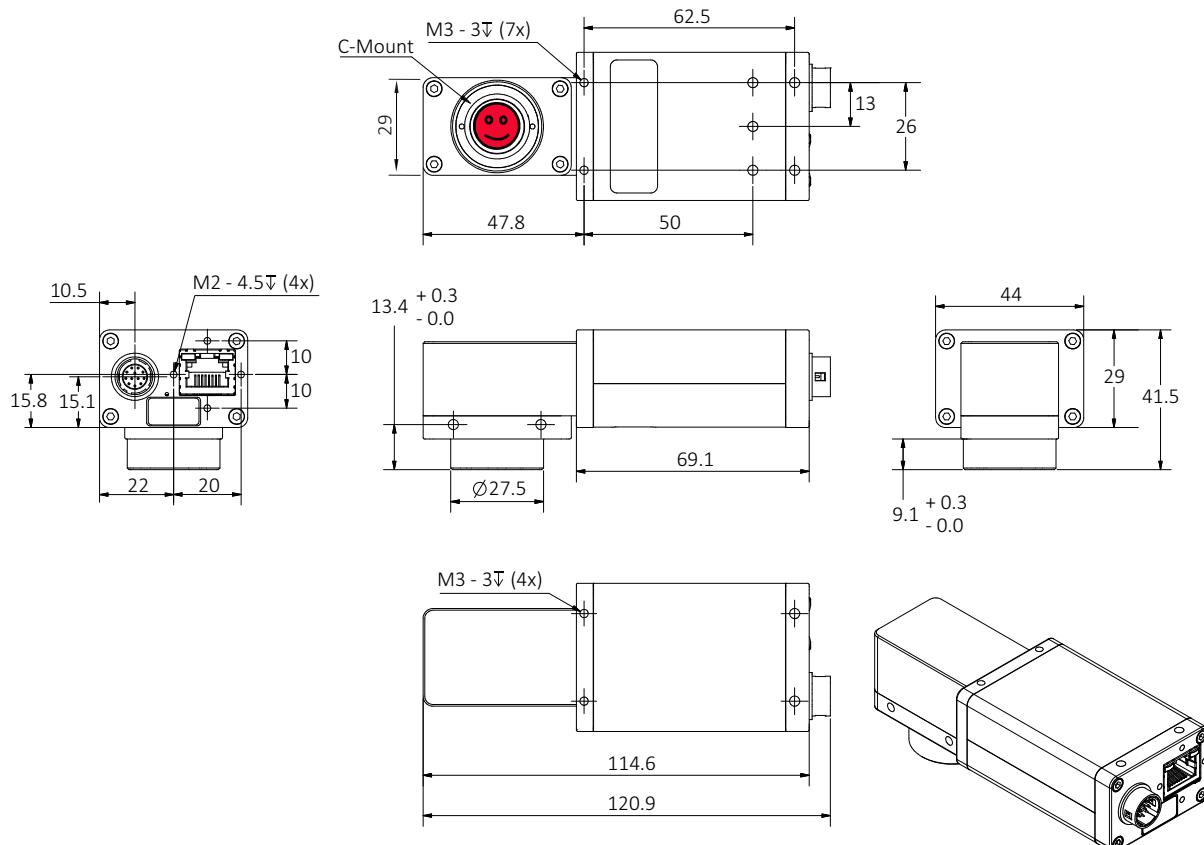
Manta type A W270 S90 housing with C-Mount dimensions
